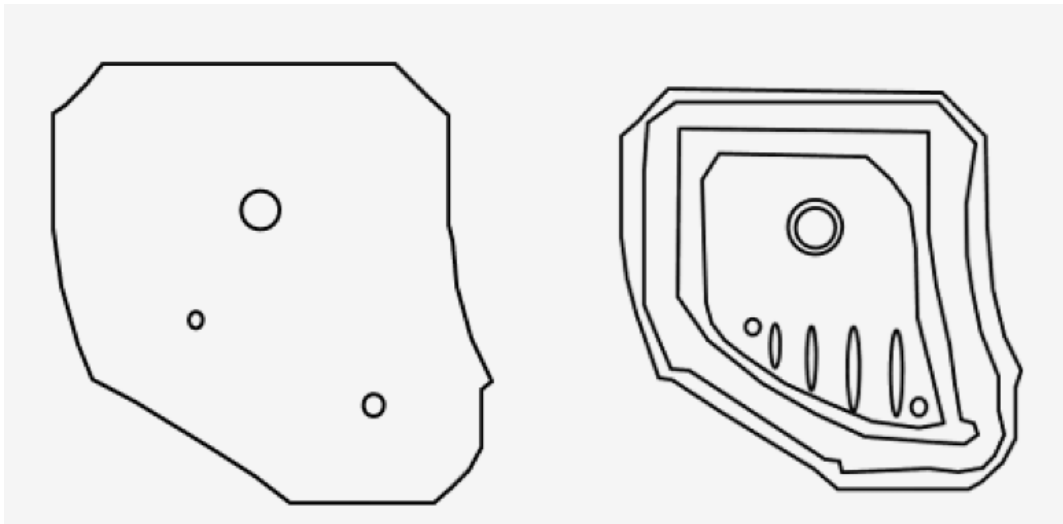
Blank metal sheet on the left, and formed car door part on the right.
